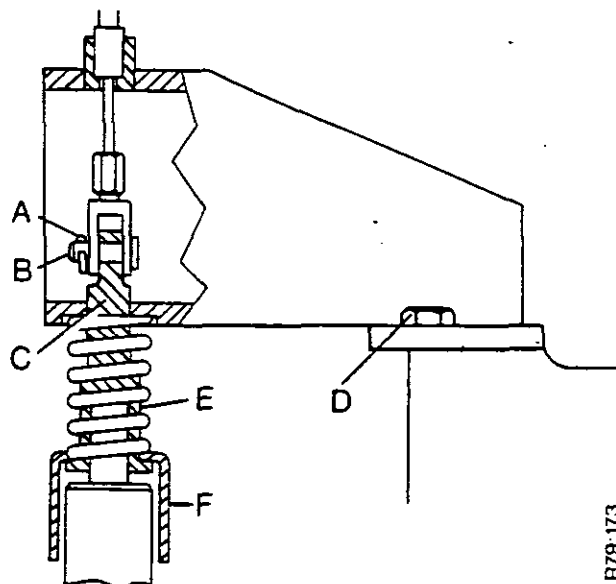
REMOVAL OF THE DUMP VALVE FOR TRACTORS WITH CAB
